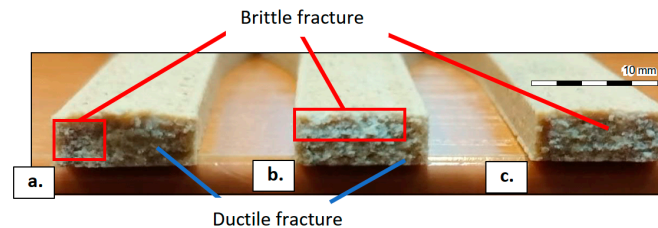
Fracture surfaces of the specimens after the tensile strength tests: (a) specimen printed at $T_p = 175\text{ }^{\circ}\text{C}$ with $h_l = 0.4\text{ mm}$ and $sp = 200\text{ mm/s}$; (b) specimen printed at $T_p = 190\text{ }^{\circ}\text{C}$ with $h_l = 0.4\text{ mm}$ and $sp = 200\text{ mm/s}$; (c) specimen printed at $T_p = 220\text{ }^{\circ}\text{C}$ with $h_l = 0.4\text{ mm}$ and $sp = 200\text{ mm/s}$.
